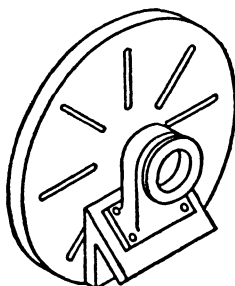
An angular face on the casting requires an angle plate with a similar angle.
